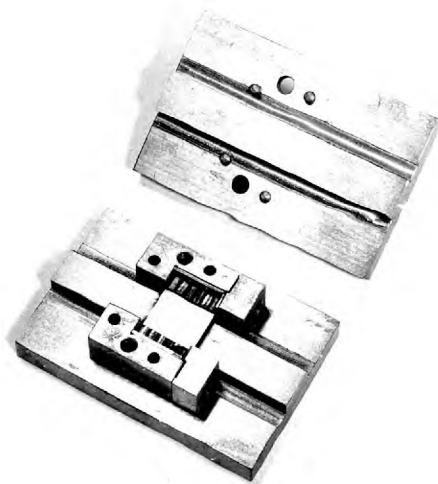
Jig for holding the tensile specimens during the grinding operation.
